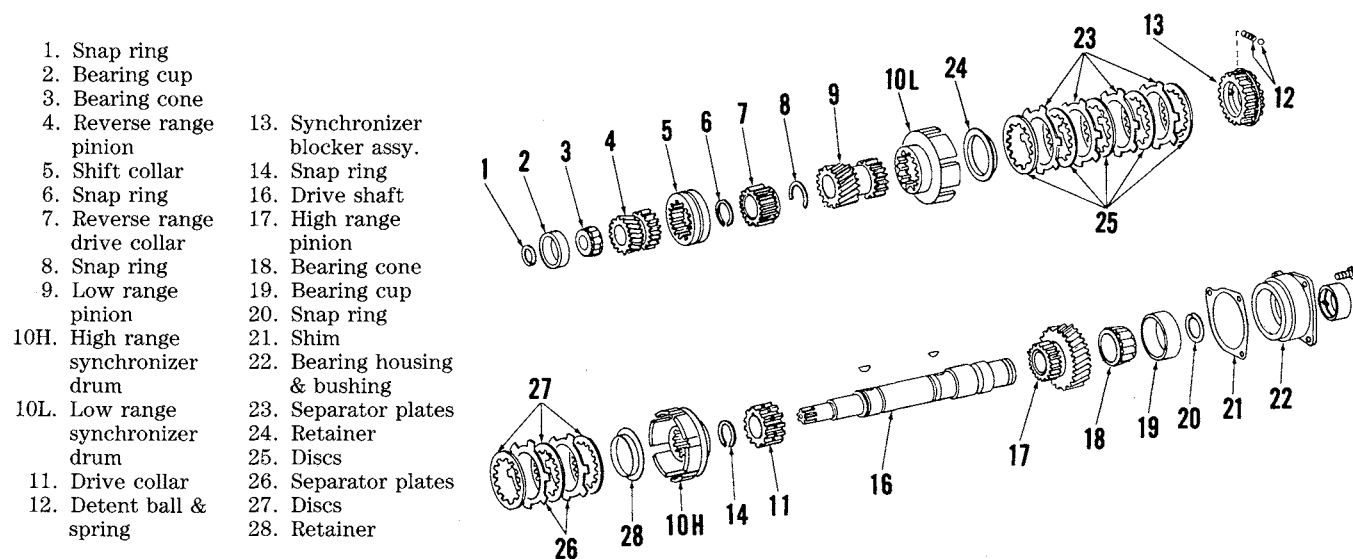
Exploded view of transmission drive shaft and associated parts used on Models 4050, 4250 and 4450. Refer to Fig. 132A for Model 4650.
